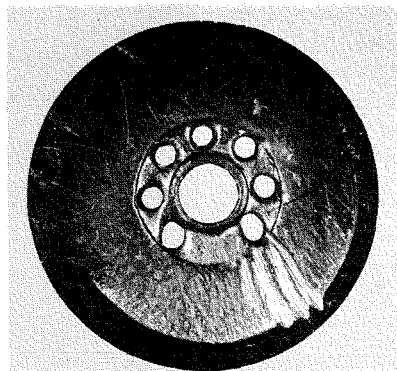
Center portion of phenolic cover after 30,000 tube insertions. Note enlarged pin holes and grooved surface.
